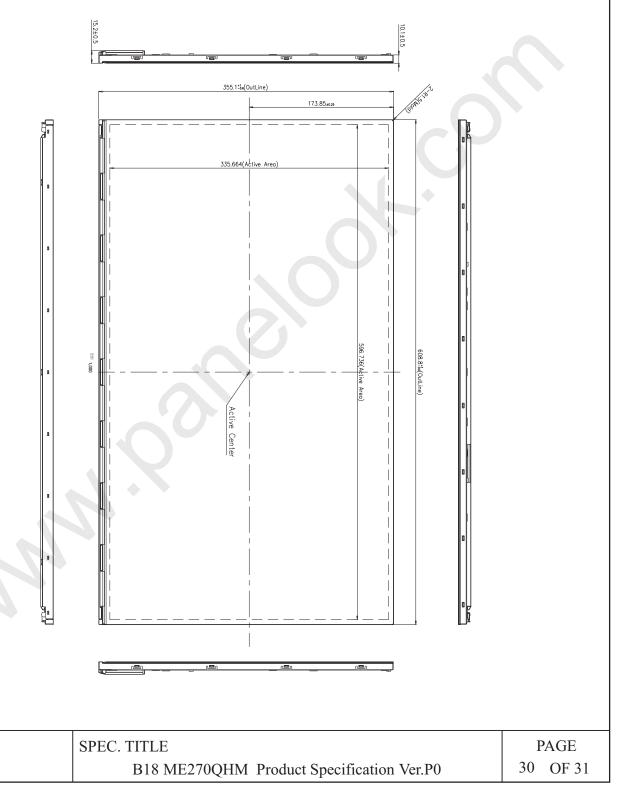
TFT-LCD Module Outline Dimensions (Rear view)
